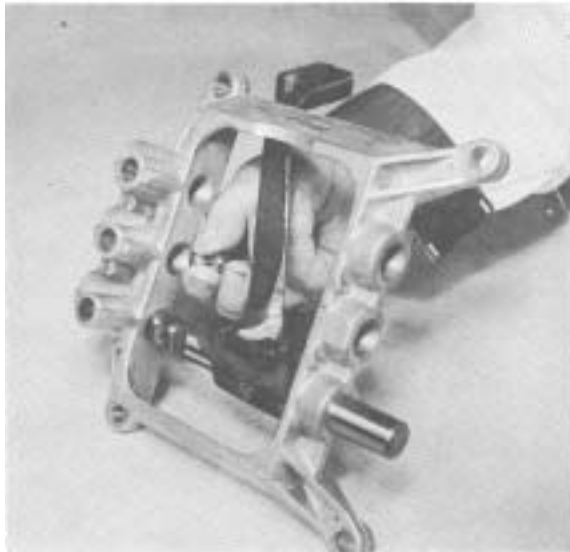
Install two interlock balls between 4th & 5th, and 2nd & 3rd shift rods.
